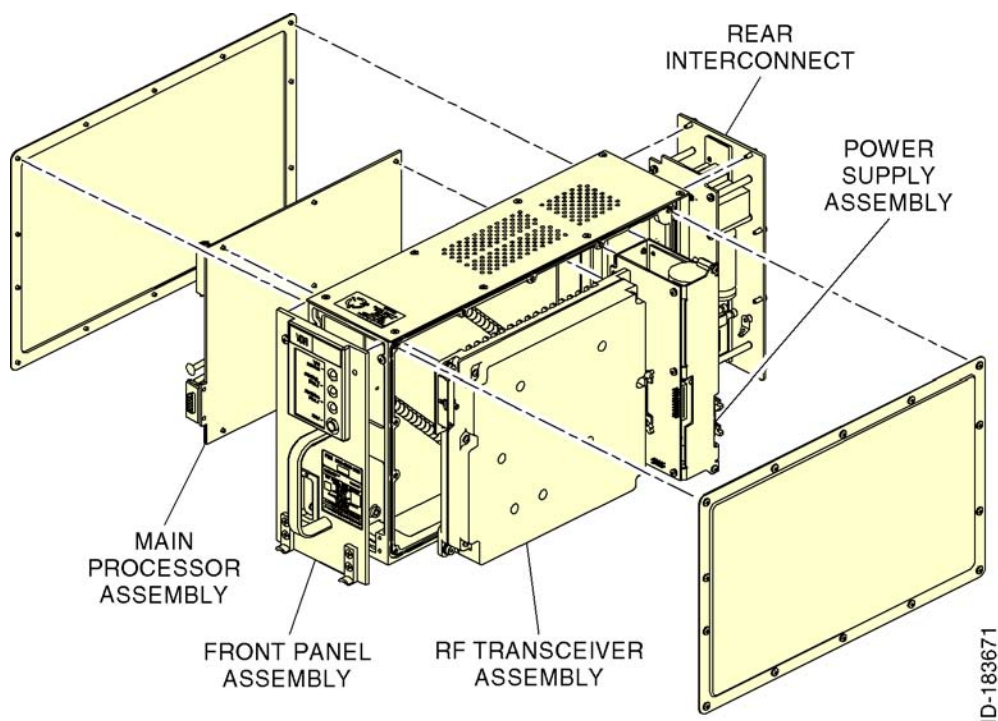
(Sheet 1 of 1) Module and Assembly Locations (GRAPHIC 23-20-59-99B-806-A01)
